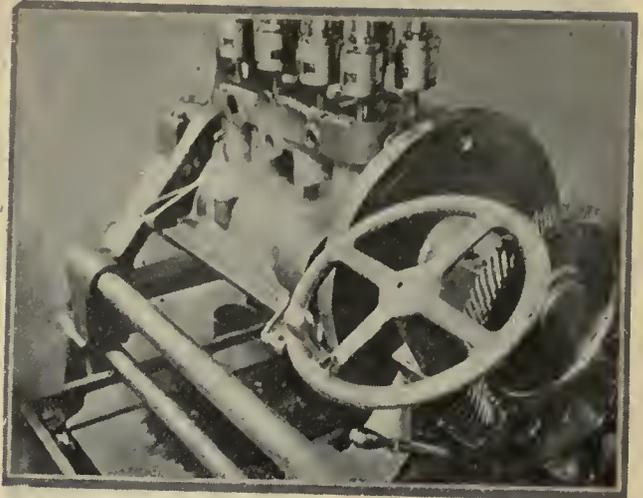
THE REVOLVING JIG USED IN CONJUNCTION WITH THE MACHINE SHOWN AT FIG. 9.
